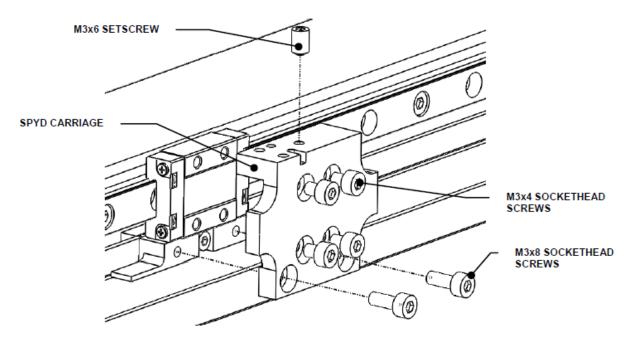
Removing the Sample Pipettor Y Drive Carriage
